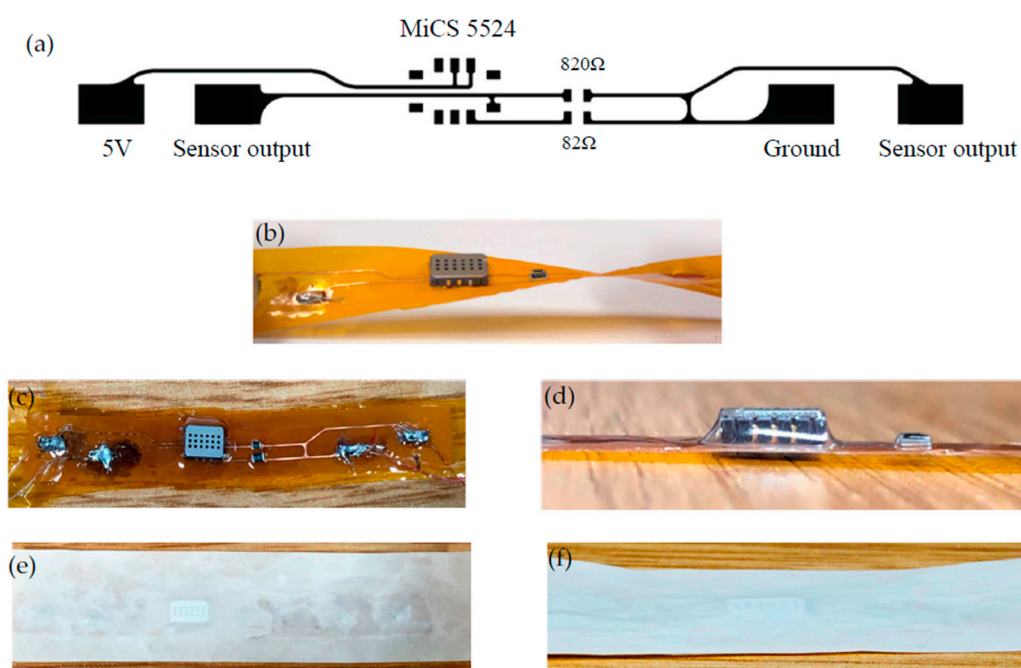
(a) The schematic illustration of flexible filament design; (b) flexible gas sensing system with MOS reducing gas sensor chip; (c) thermoplastic polyurethane encapsulated by vacuum forming method on the flexible gas sensor; (d) side view of TPU encapsulated system; (e) top view of Zitex encapsulated; (f) side view of Zitex encapsulated system.
